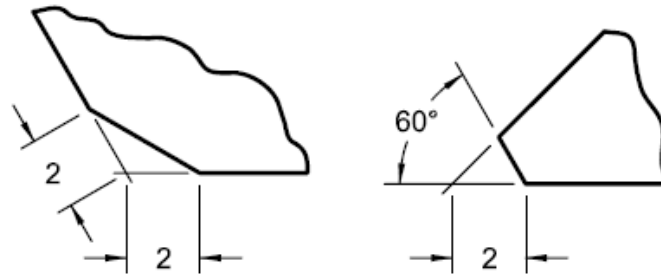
Dimensioning of non-perpendicular intersecting surfaces
